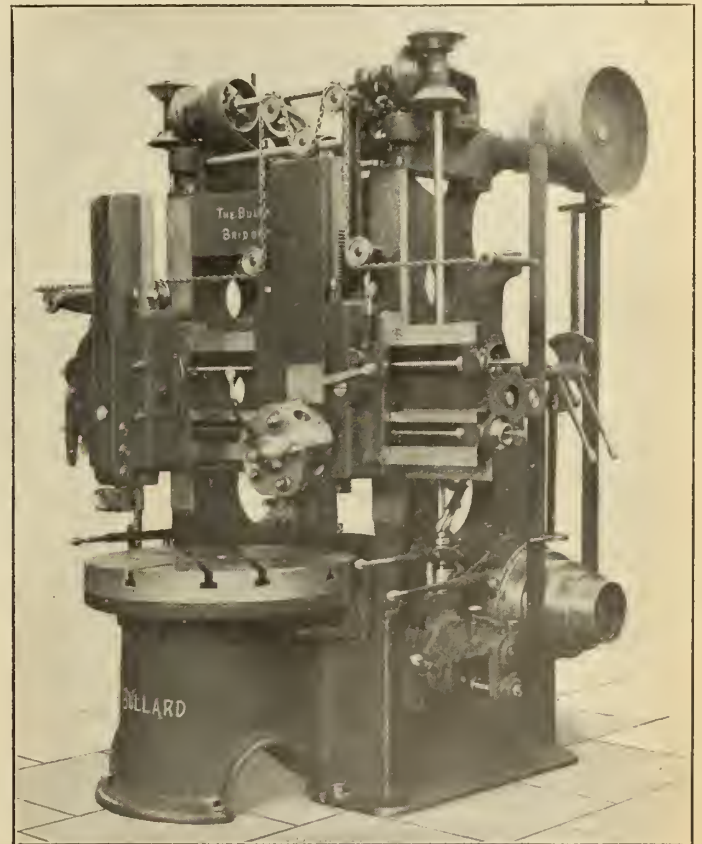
Forty-two-inch Mill, with One Swing and One Turret Head.
